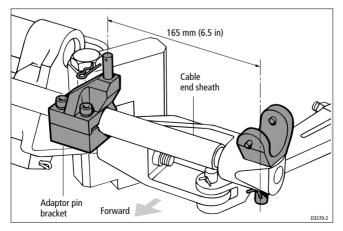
Fitting the adaptor pin bracket (Mercruiser 93/OMC/Yamaha) 3. Fit the I/O drive into the girdle support bracket (see *Figure 9*):
